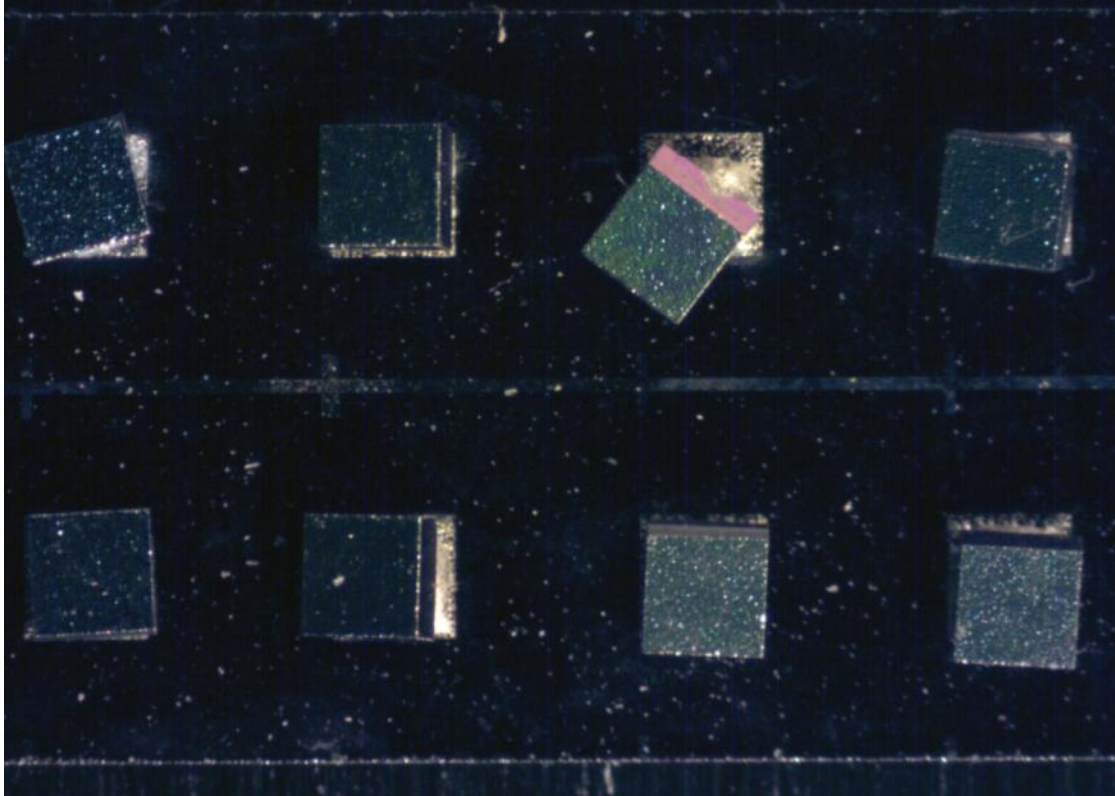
Sites with assembled parts. This assembly was conducted through manual placement of the parts onto the sites using a pipette to move parts into position. Note that the top row misalignment does not interfere with neighboring assemblies. Figure 4-5 illustrates the important dimensions of the site patterning.
